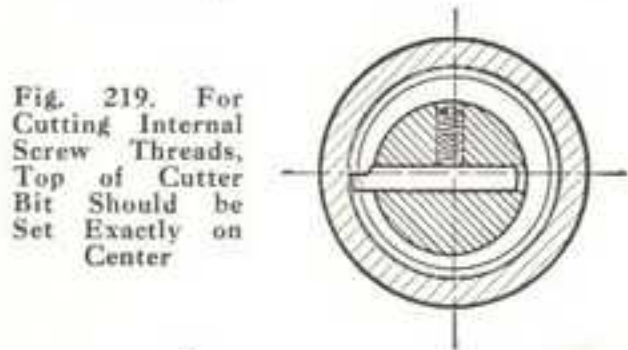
For Cutting Internal Screw Threads, Top of Cutter Bit Should be Set Exactly on Center
